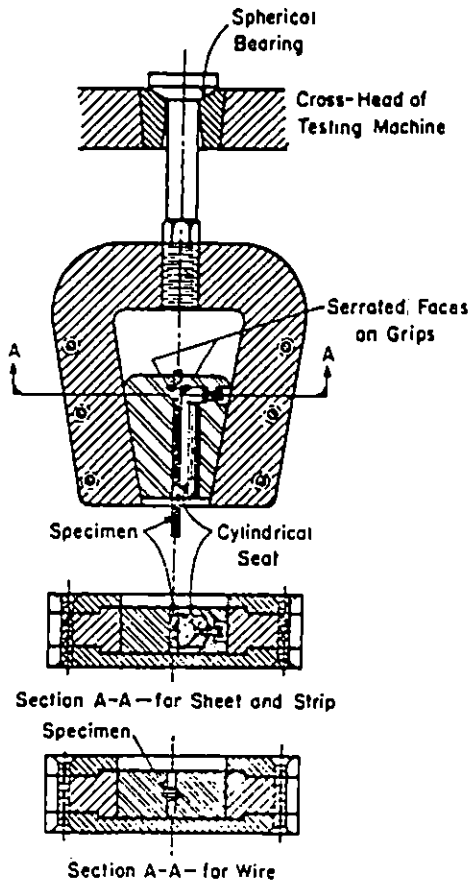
Gripping Devices for Sheet and Wire Specimens
